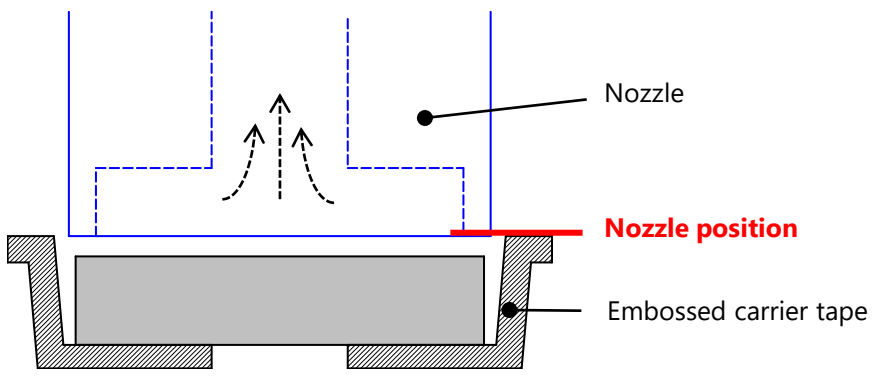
Cross-sectional view of a nozzle when transporting an Nichia 757 series LEDs to a PCB
